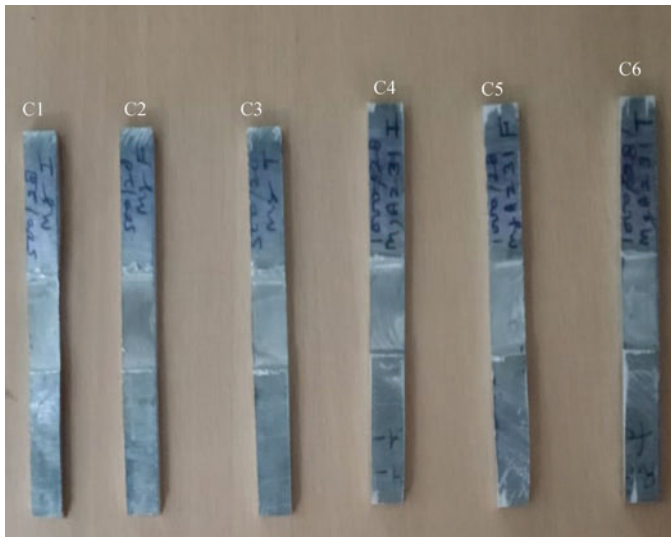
The samples prepared for flexural test to be carried out on Universal Testing Machine as per ASTM B577 standard
